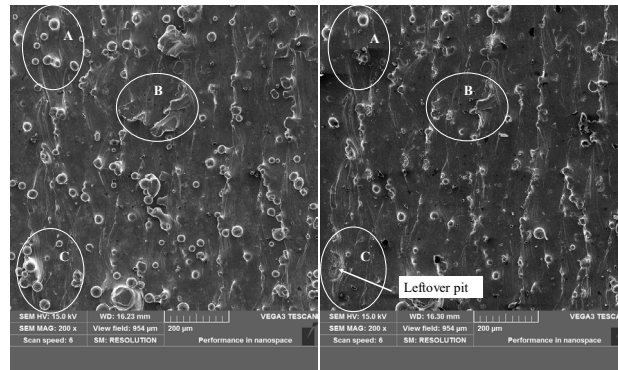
SEM images of the surfaces: (a) as-manufactured AM workpiece surface; (b) surface after ultrasonic abrasive polishing
